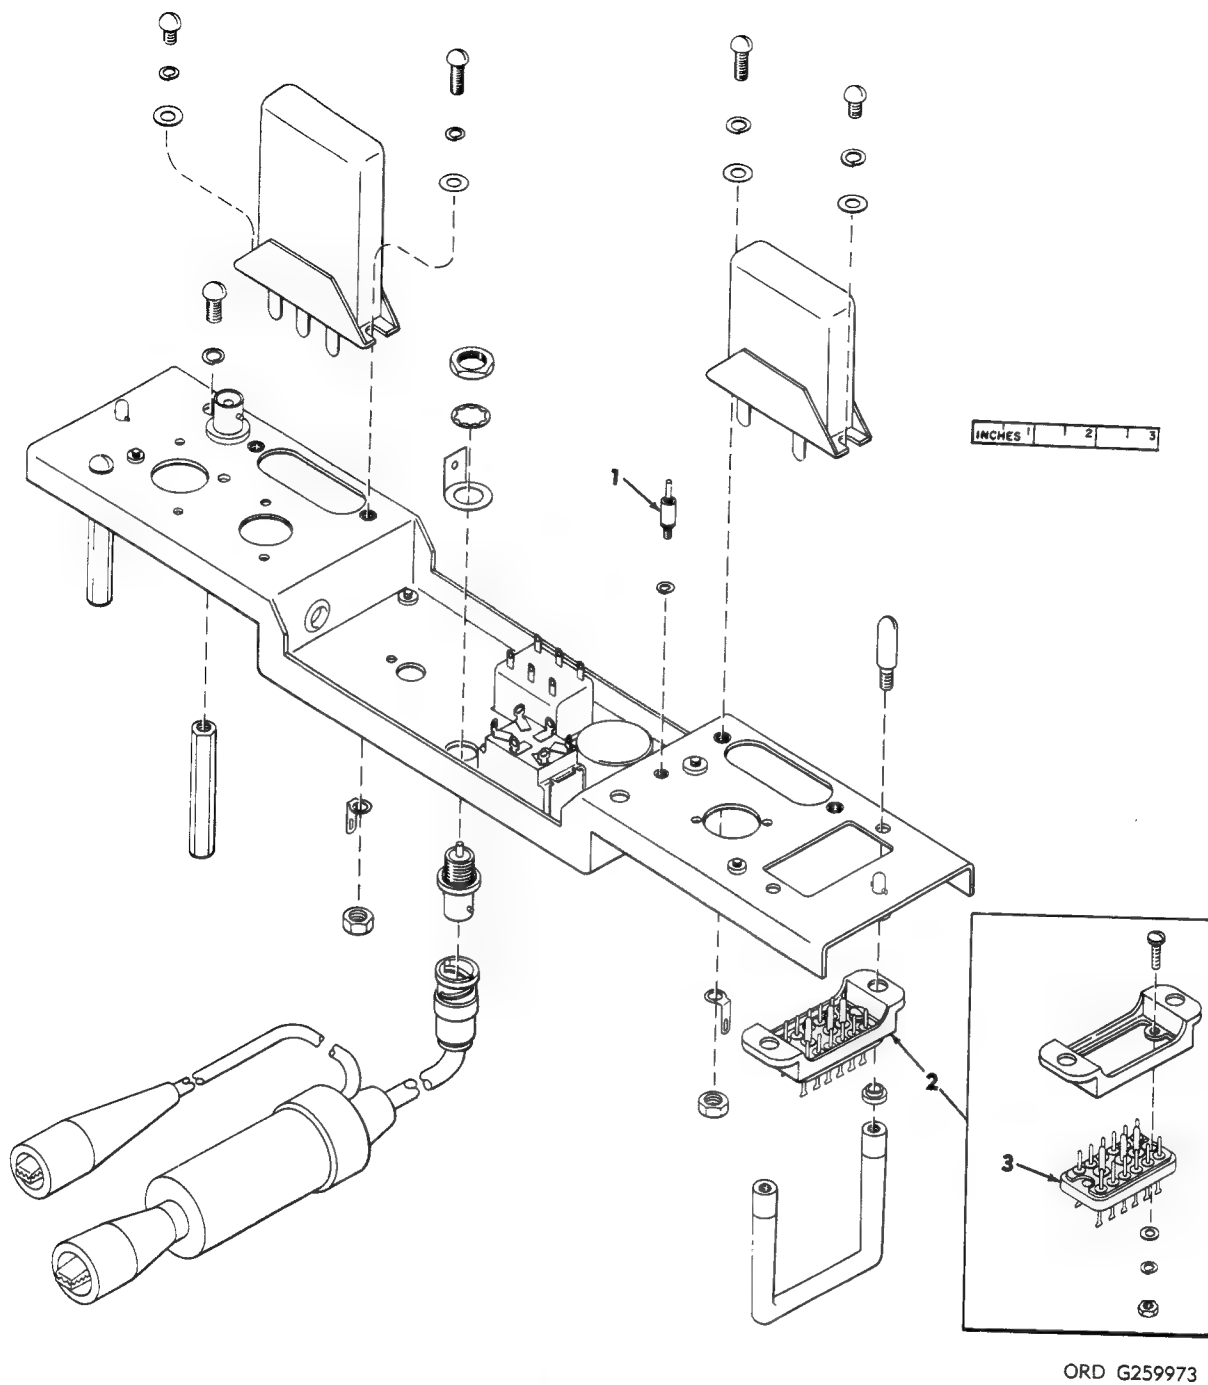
Generator, pulse O-305/M and O-306/M (8007727 and 8007728)—partial exploded view
